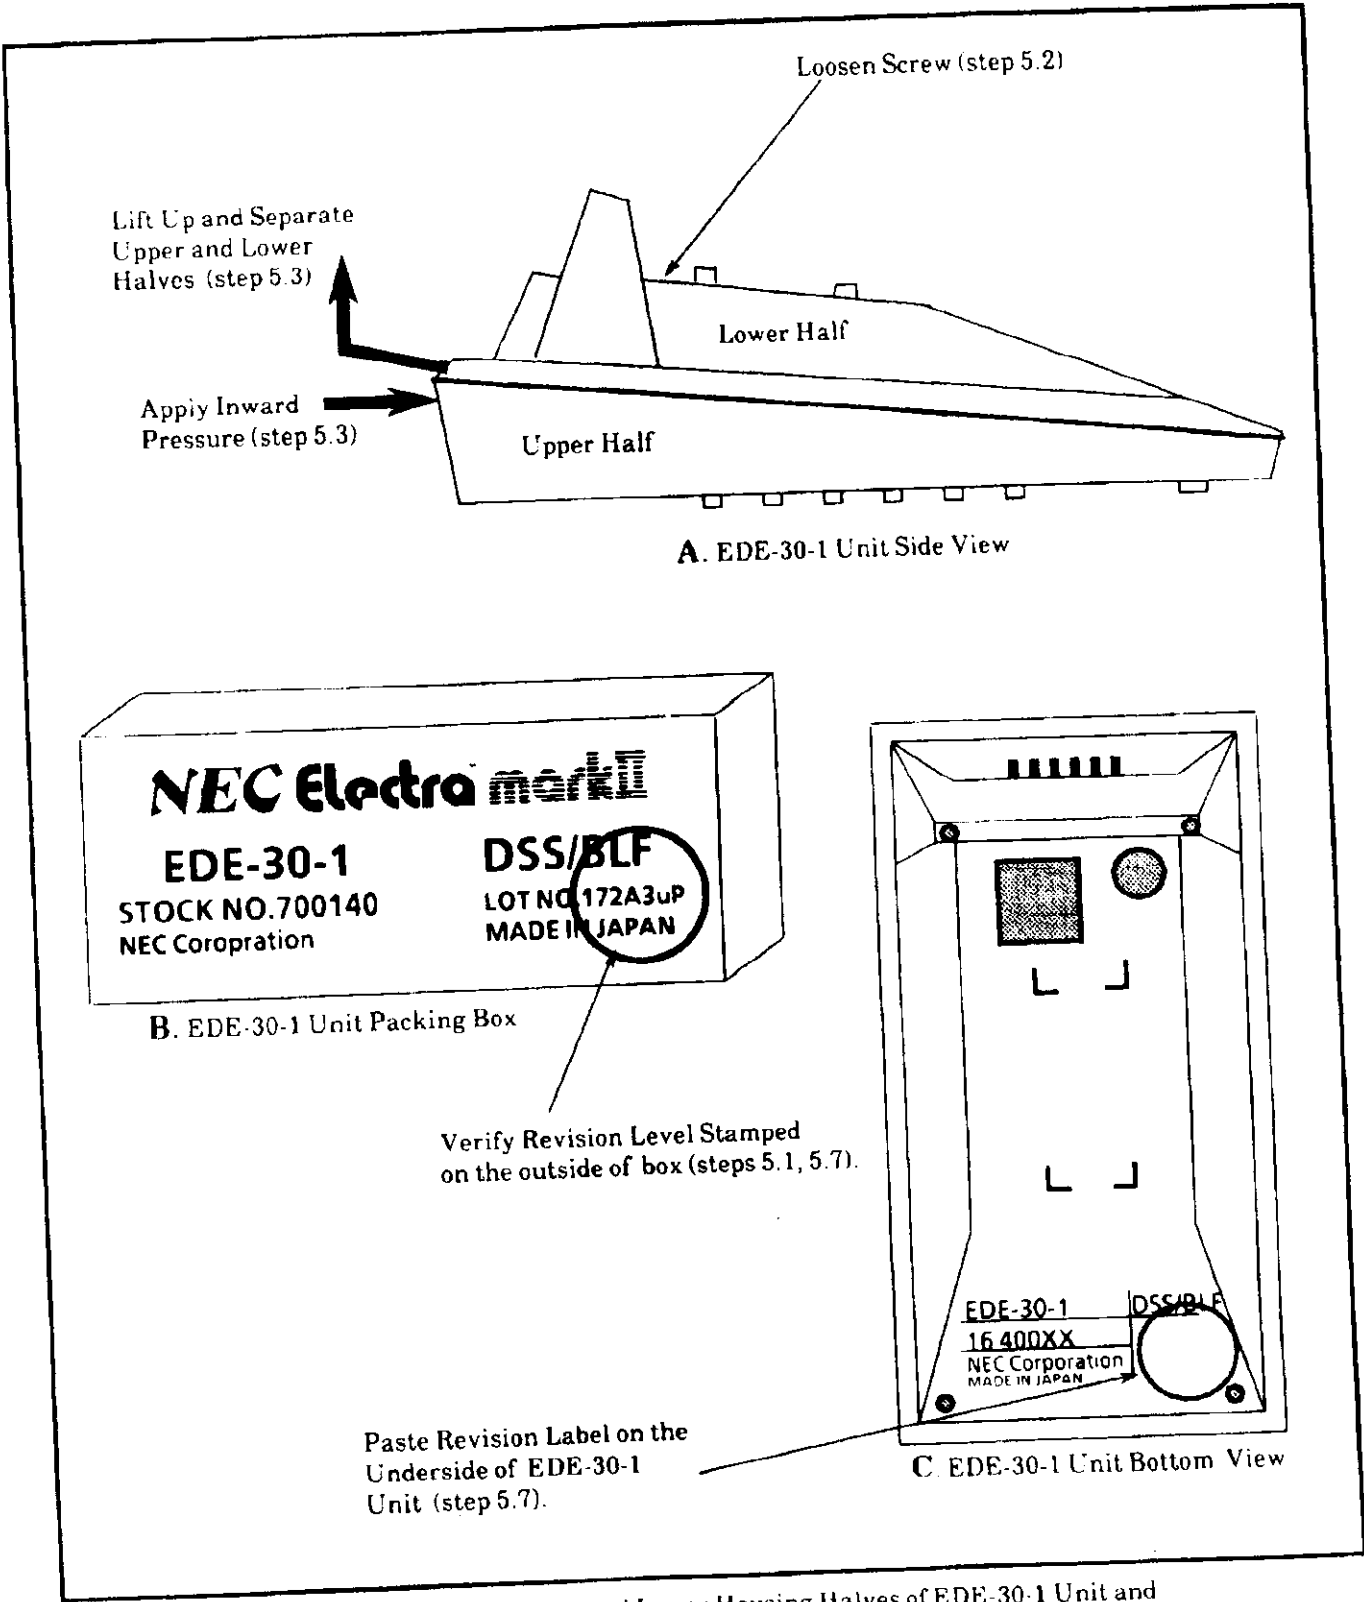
Separating Upper and Lower Housing Halves of EDE-30-1 Unit and Locating Revision Level Label
